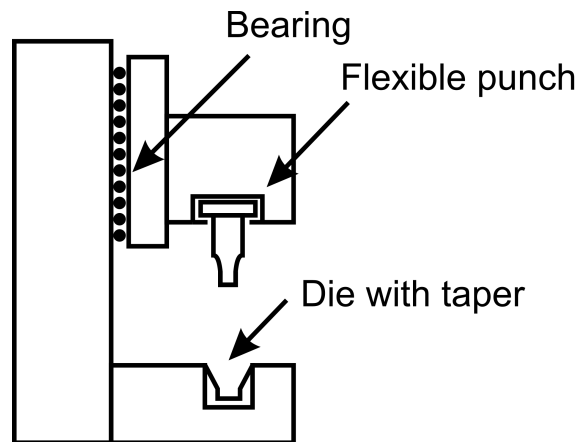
Illustration of self-alignment between tool elements through floating tool elements.
